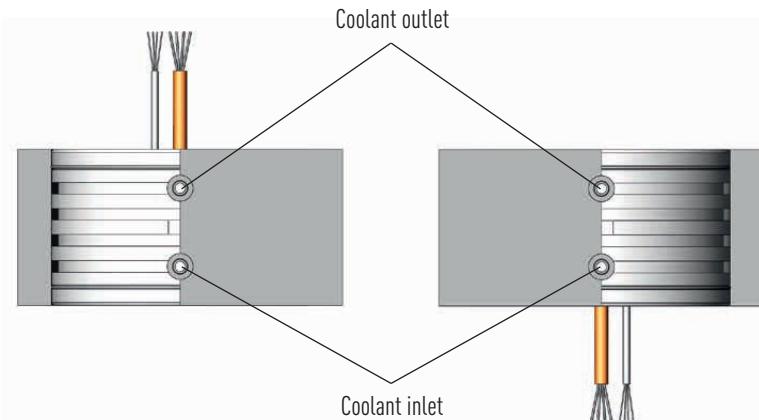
Coolant inlet and outlet in horizontal mounting position
